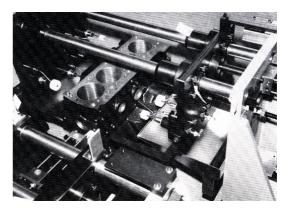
Example of application of sealant to inner circumference of sand draining holes of cylinder blocks (3B Coater RTM)
